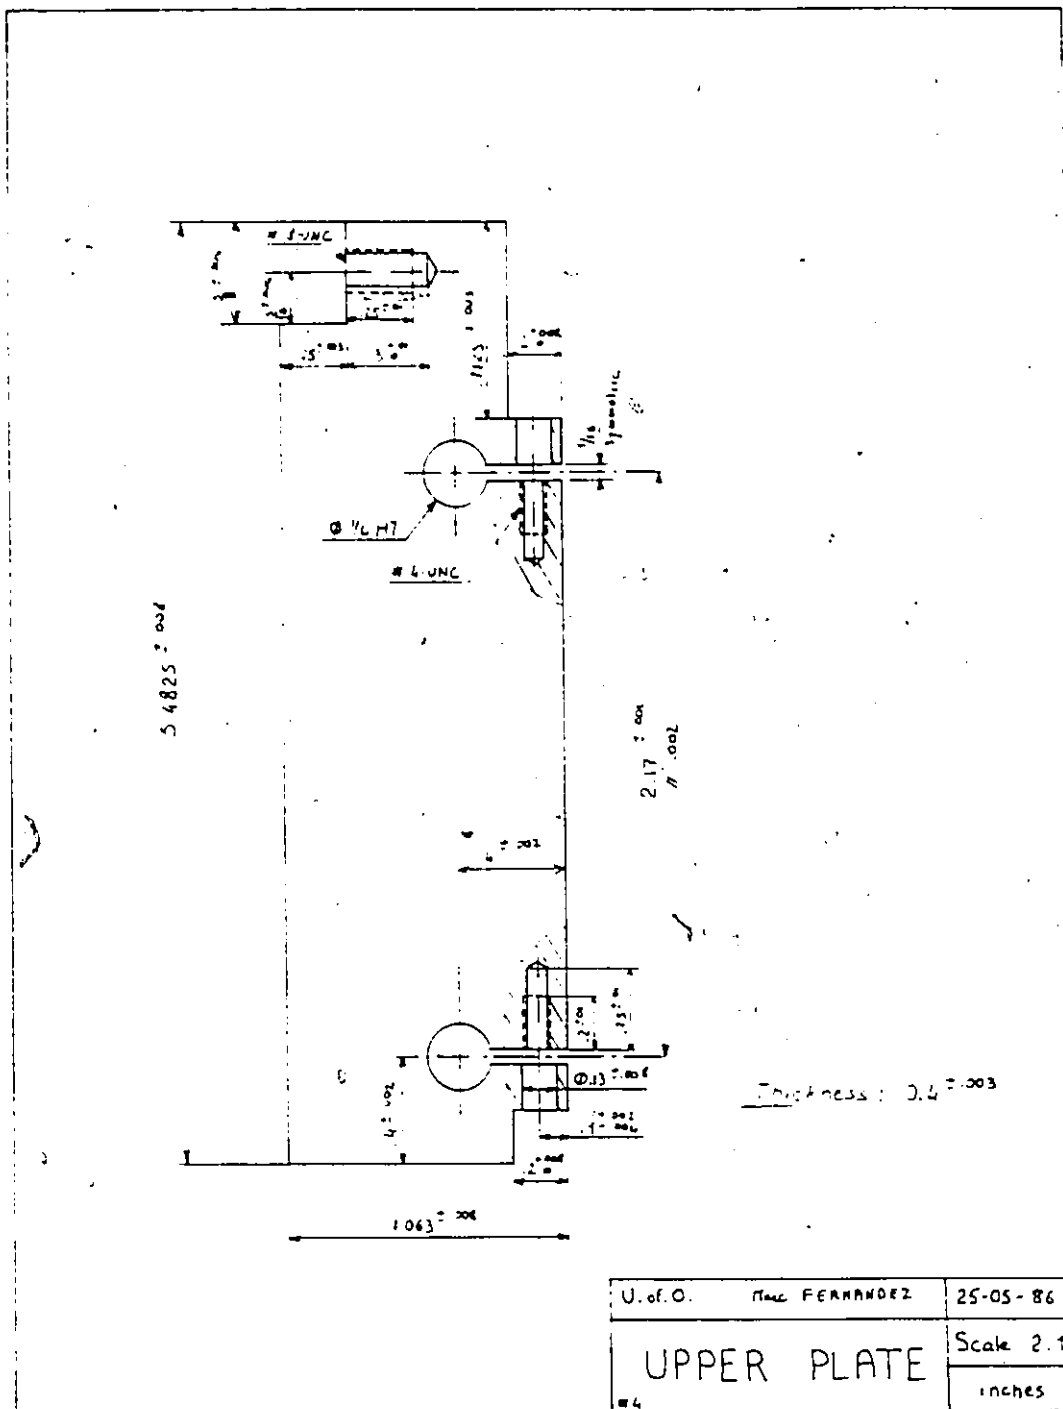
Design drawings of the active counterweight system prototype (continued)
